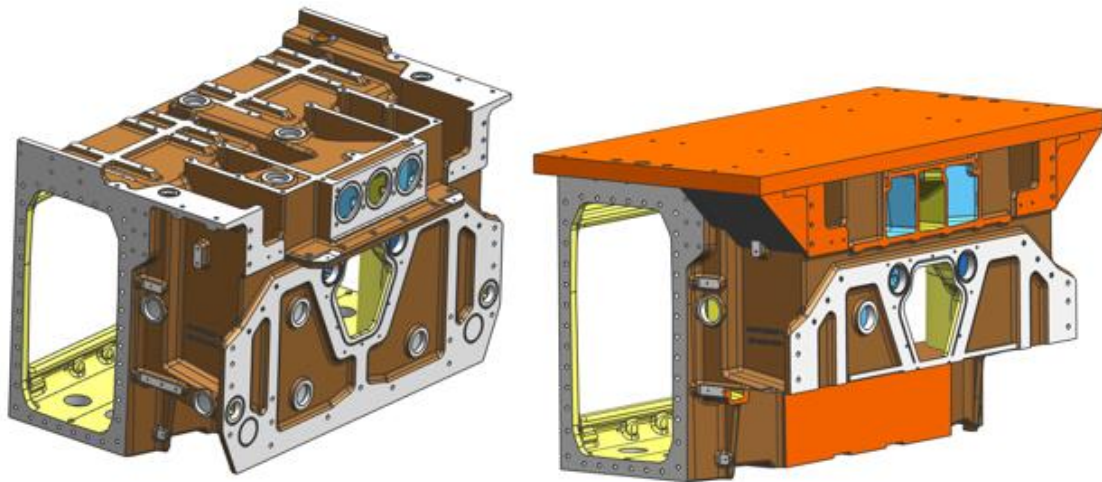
The original turbocharger bracket (left) and a modified turbocharger bracket (right). The orange surfaces presents faces that are cut or modified.
